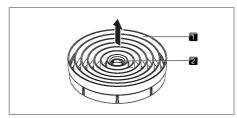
Removing air inlet nozzle PURA, PURU
